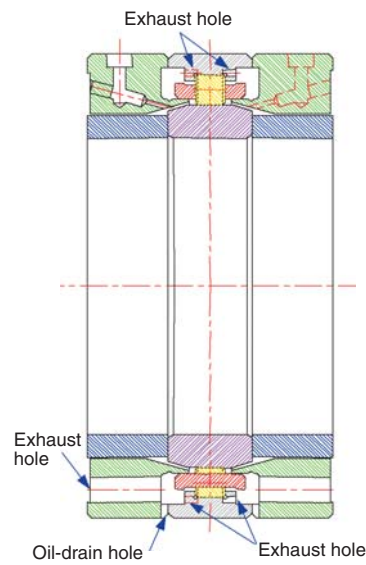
Oil-drain hole structure NU-type cylindrical roller bearing
